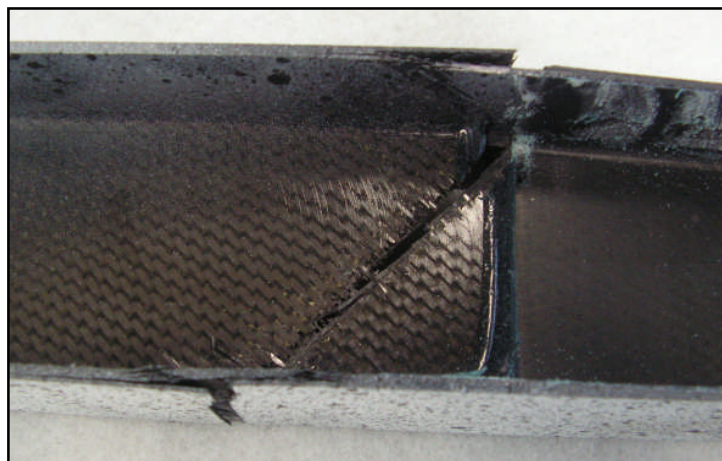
Laminate fracture initiating from the test fixture
